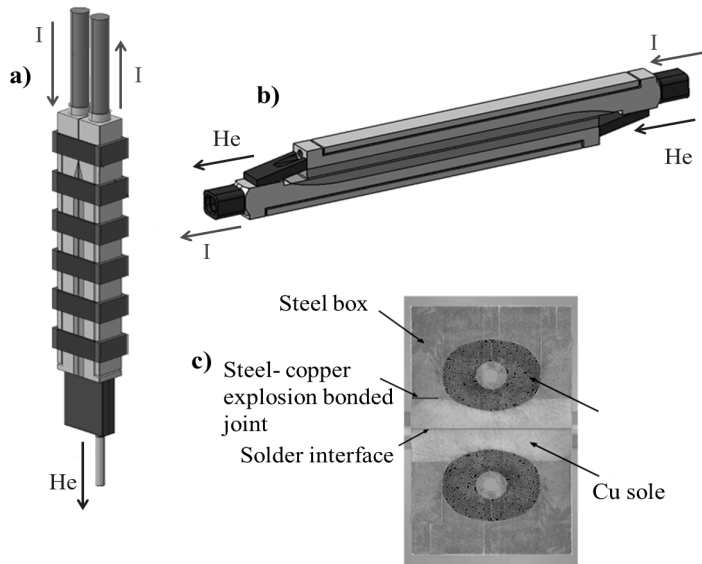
Lap-type joints: (a) praying hands configuration, (b) shaking hands configuration and (c) cross-section.
